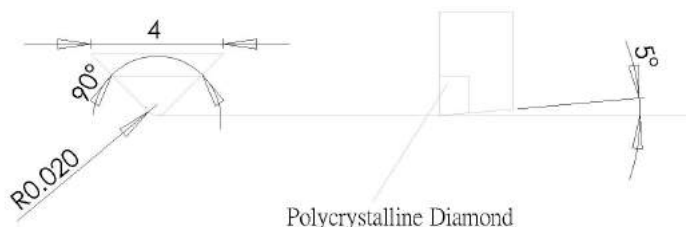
The designed drawing of the polycrystalline diamond tool.
